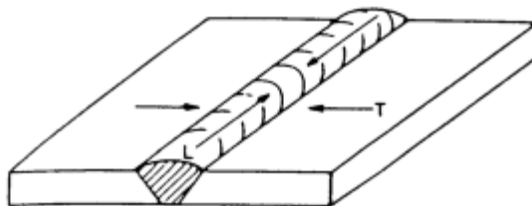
Longitudinal (L) and transverse (T) shrinkage stresses in a butt weld.
